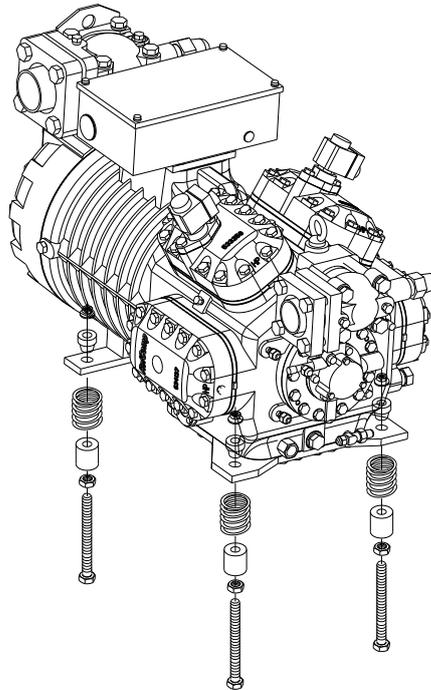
Rubber dampers assembling on PP8-L/H compressors
